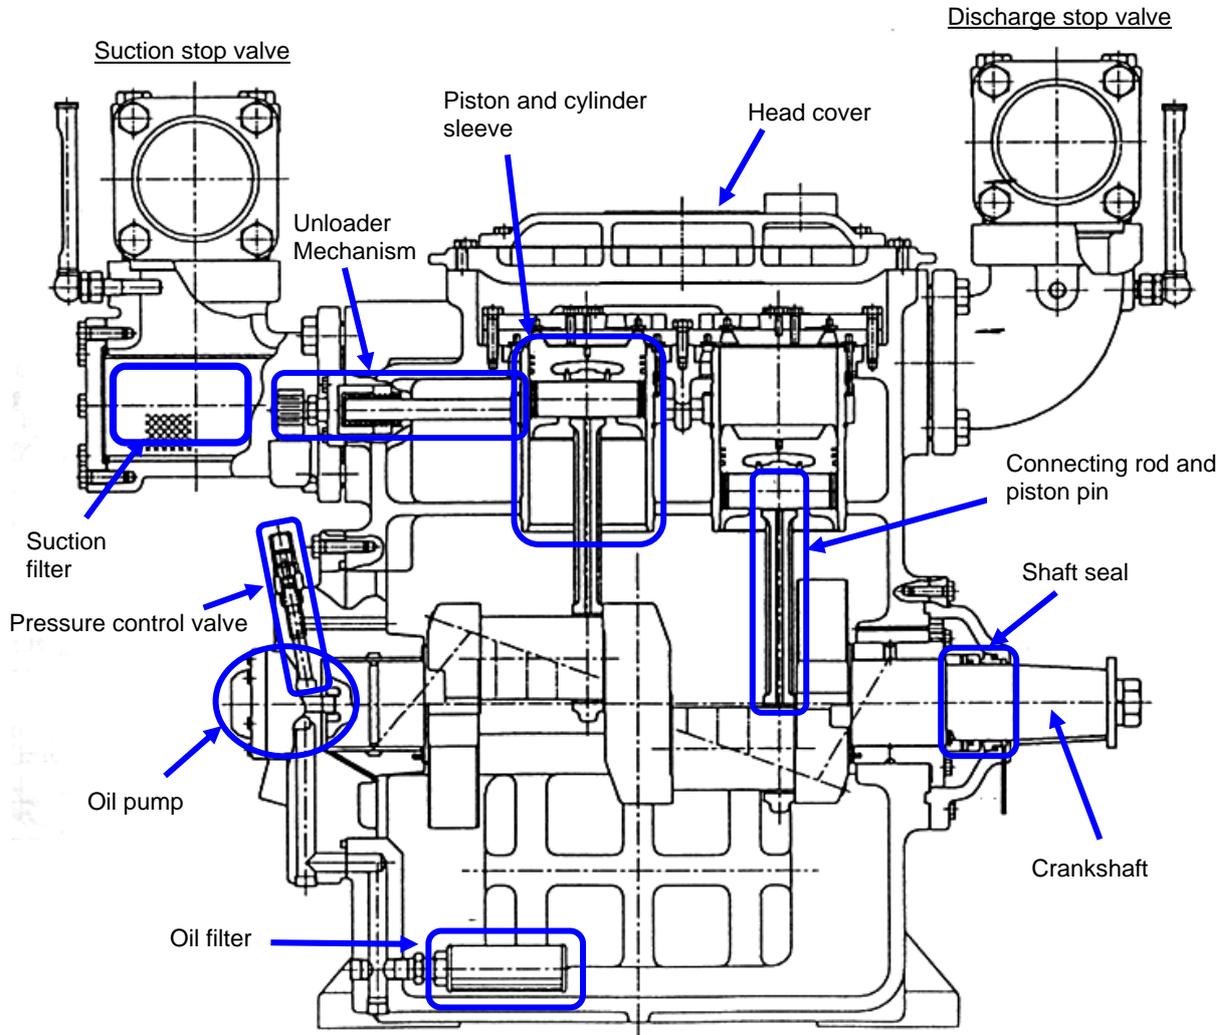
Sectional View of the Compressor (ex.: 8L)
